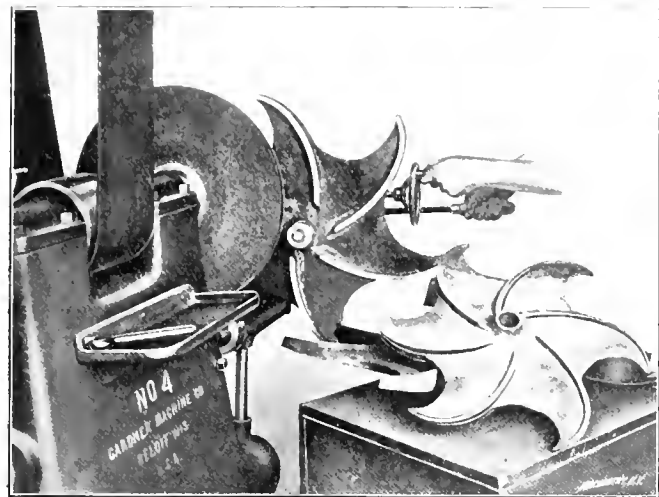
Grinding Vanes of Cast Iron Impellers.
